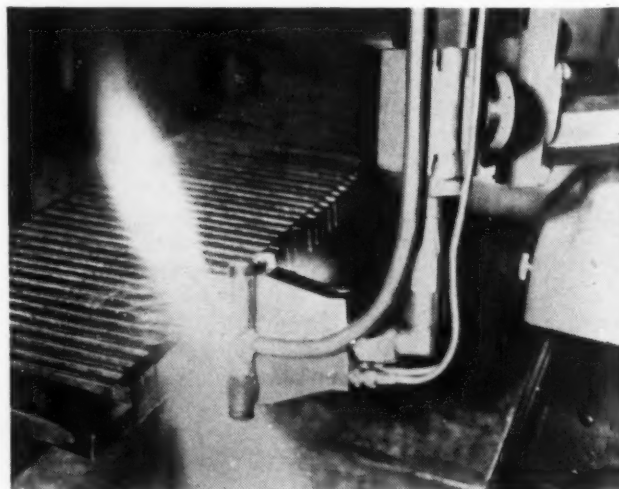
PRODUCTION HARDENING PIPE WRENCHES WITH A 30-FLAME HEATING HEAD
